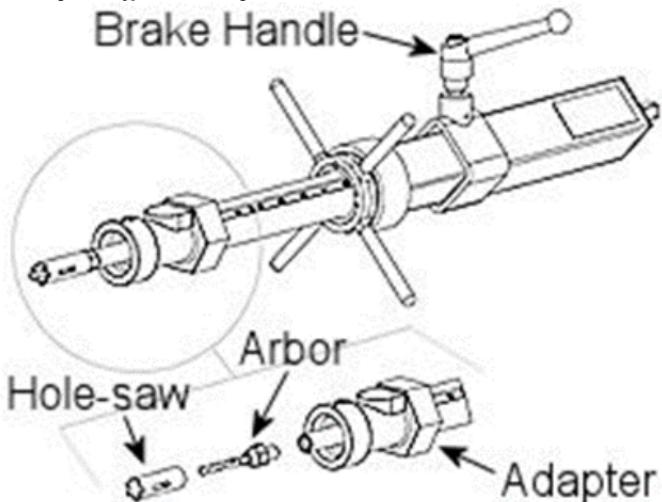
Adapter to be Threaded on the Lead Tube.
